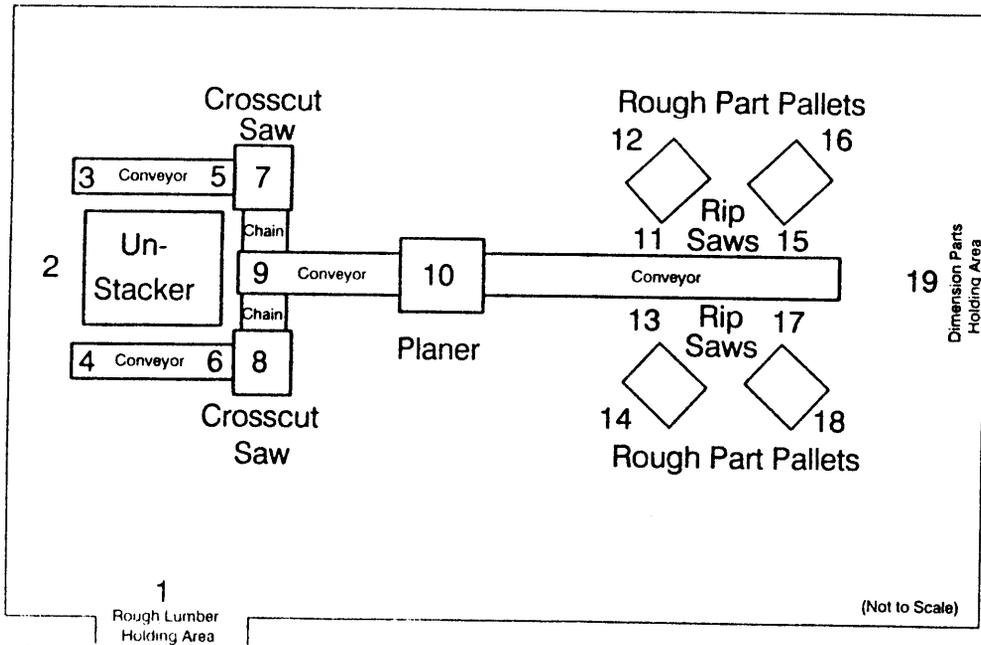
Floor plan of a typical rough mill layout with the 19 station locations.
